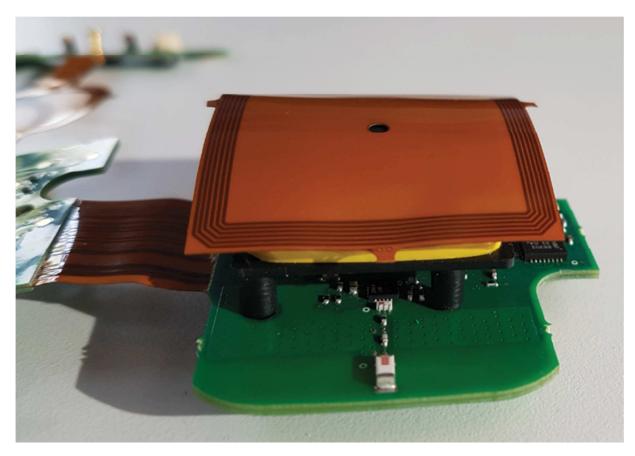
Side view of Radio Module and flexible PCB with radio coil
